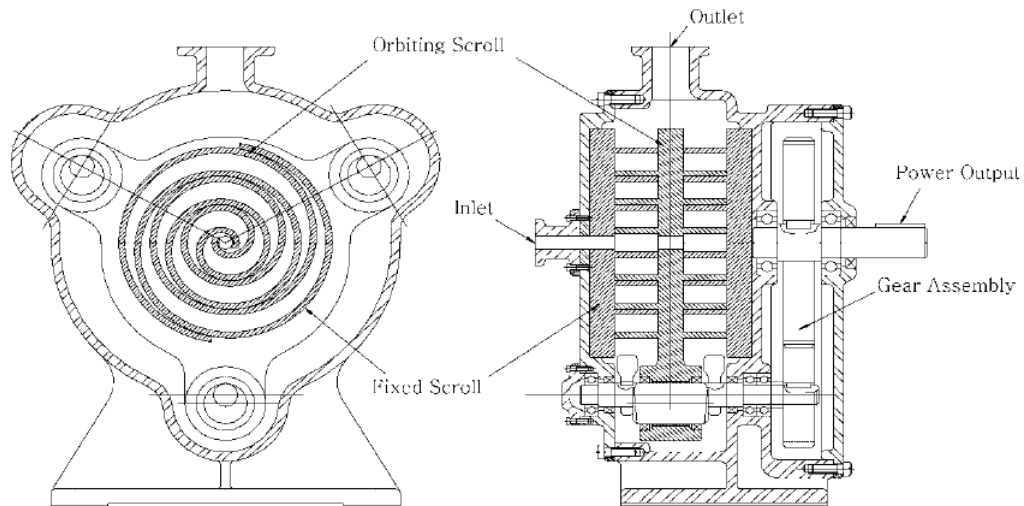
Layout of the double-sided scroll expander assembly [23]
